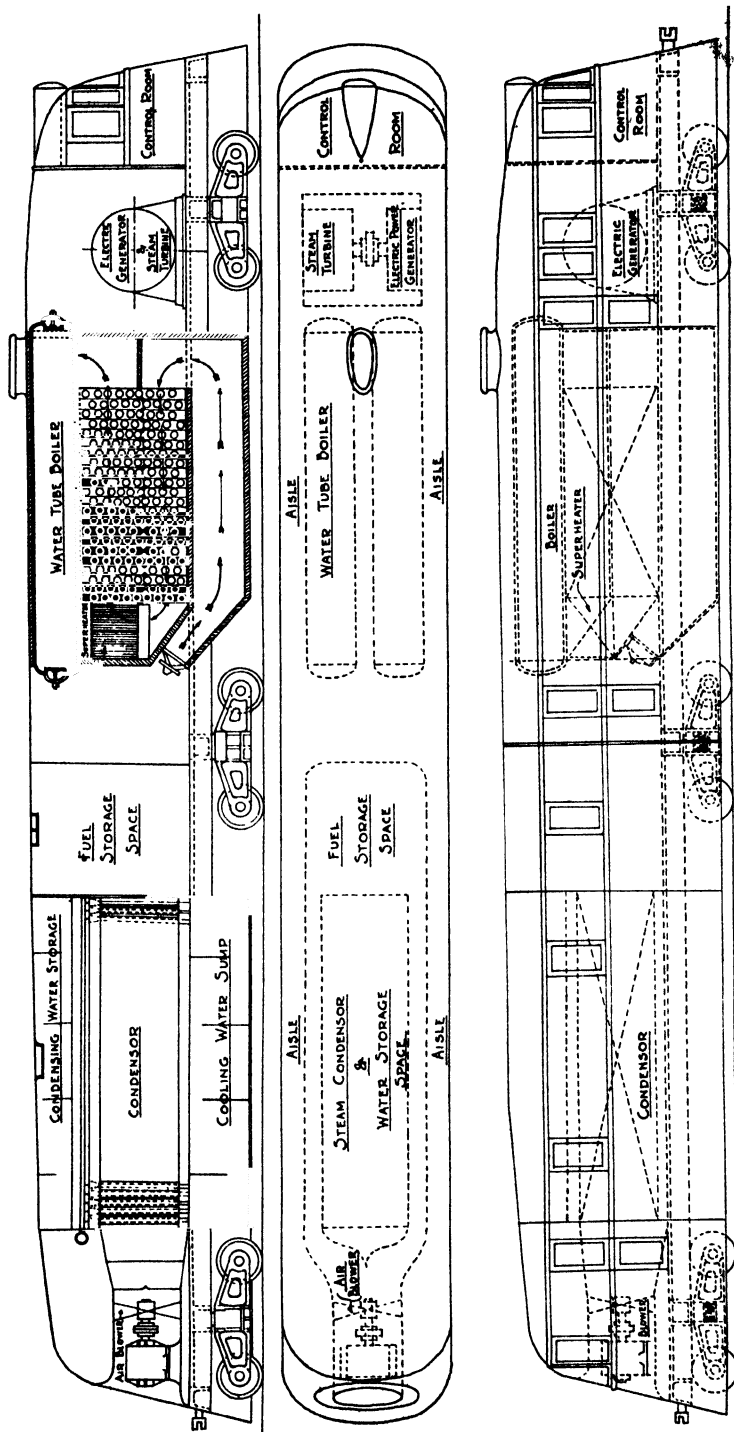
Primary general arrangement of steam electric locomotive power unit. Sectional view (top), top plate (center), side elevation (bottom).
